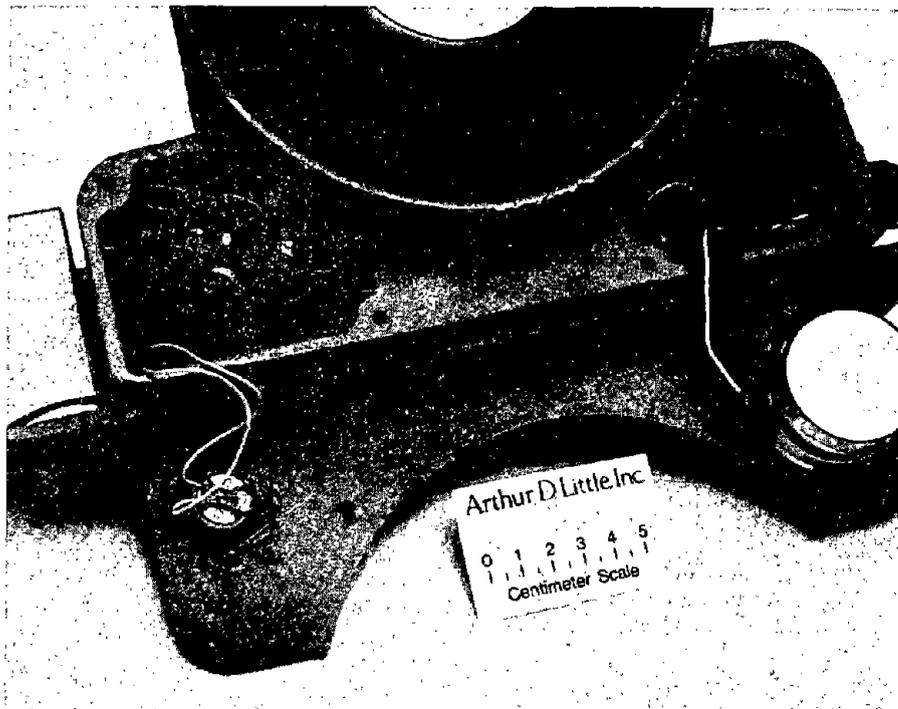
PROTOTYPE ELECTRONIC MODULE MOUNTED IN THE TROLLEY CARRIER PHONE SPEAKER ASSEMBLY
